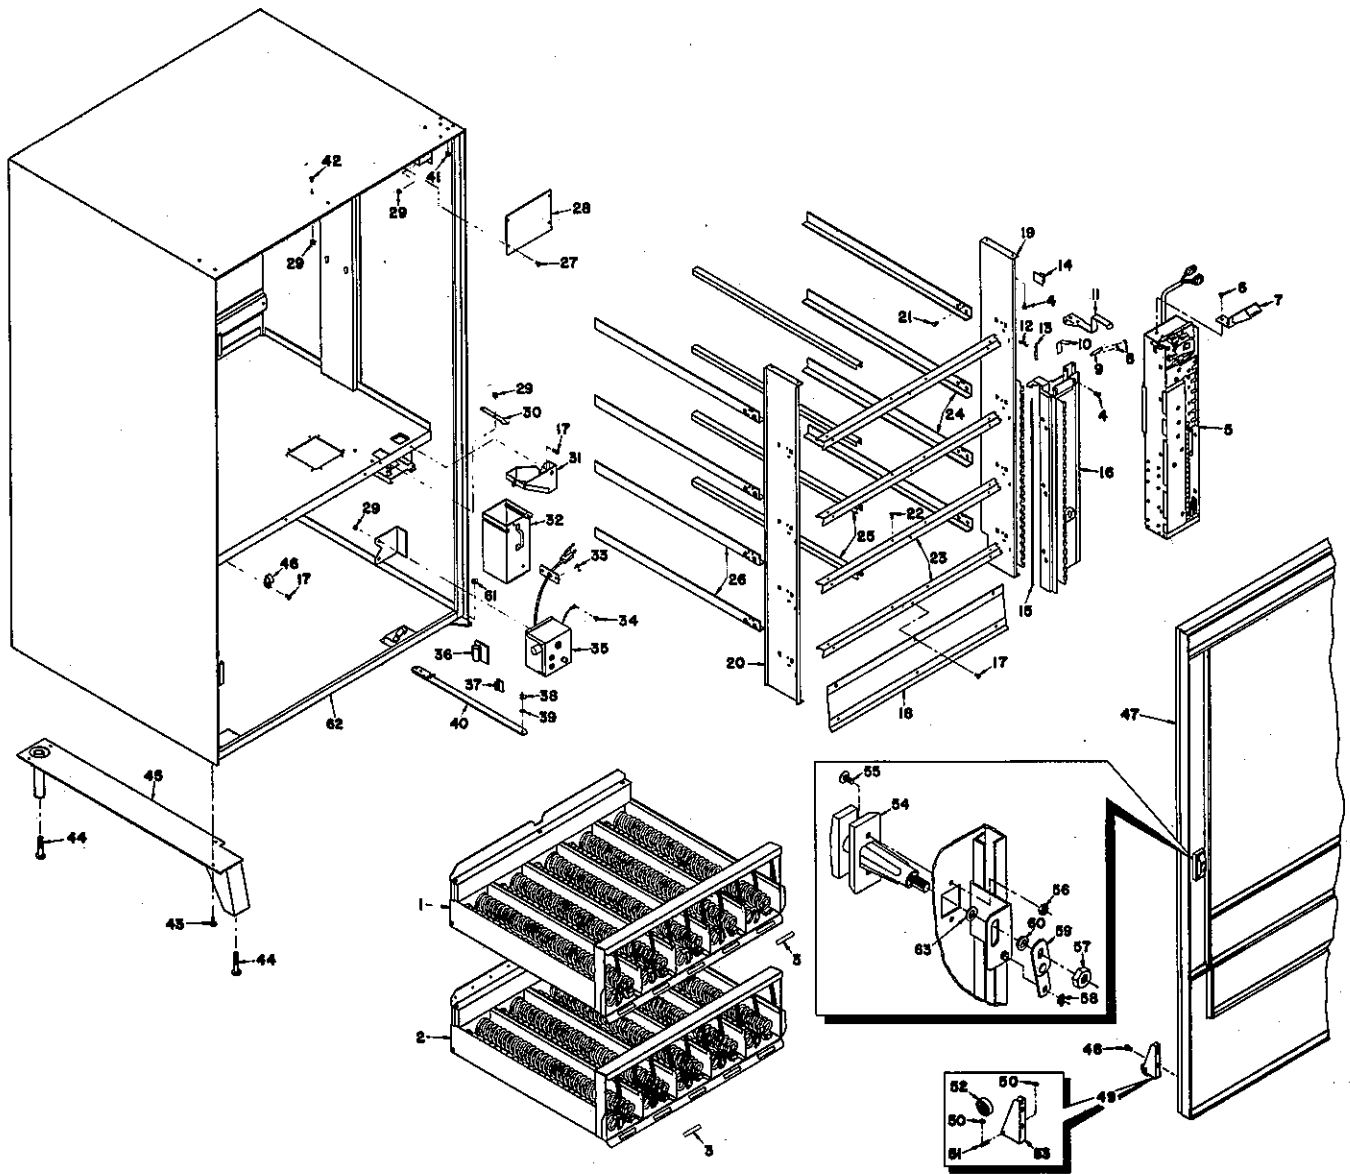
MACHINE FINAL ASSEMBLY WITHOUT MINT
